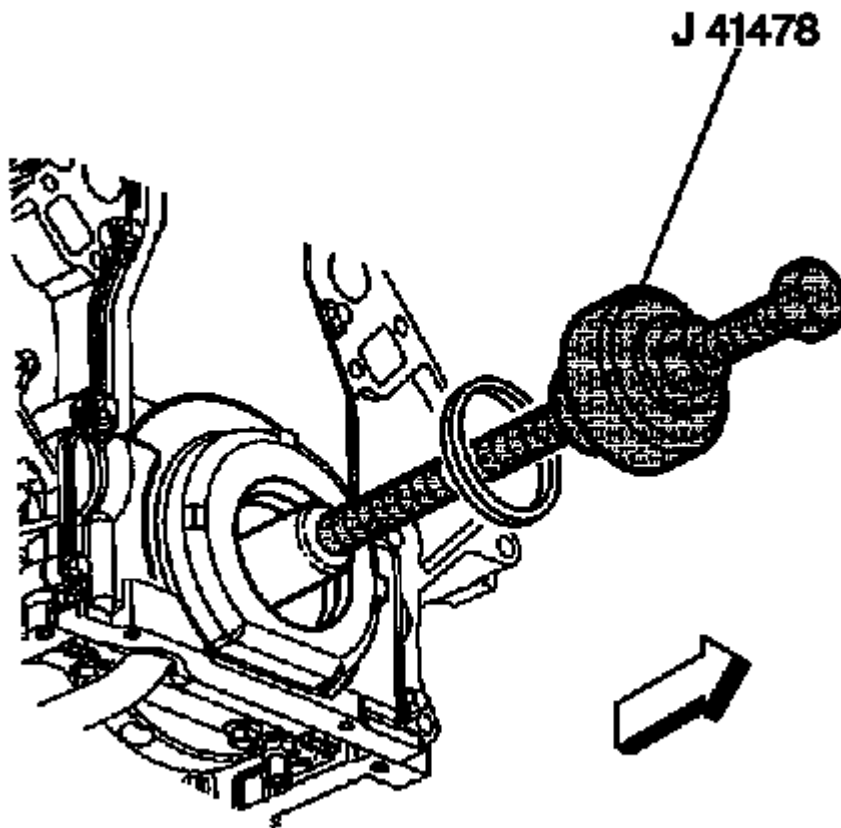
Installing The Crankshaft Front Oil Seal Using J 41478
